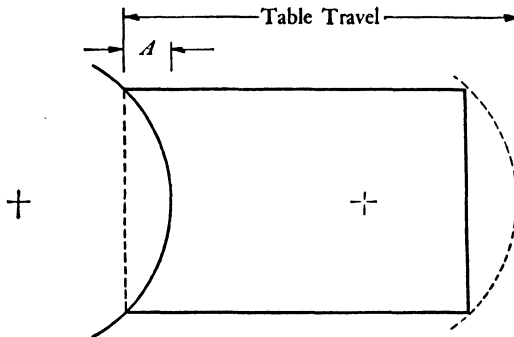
Approach and over-run for face-mill with larger diameter than width of component
